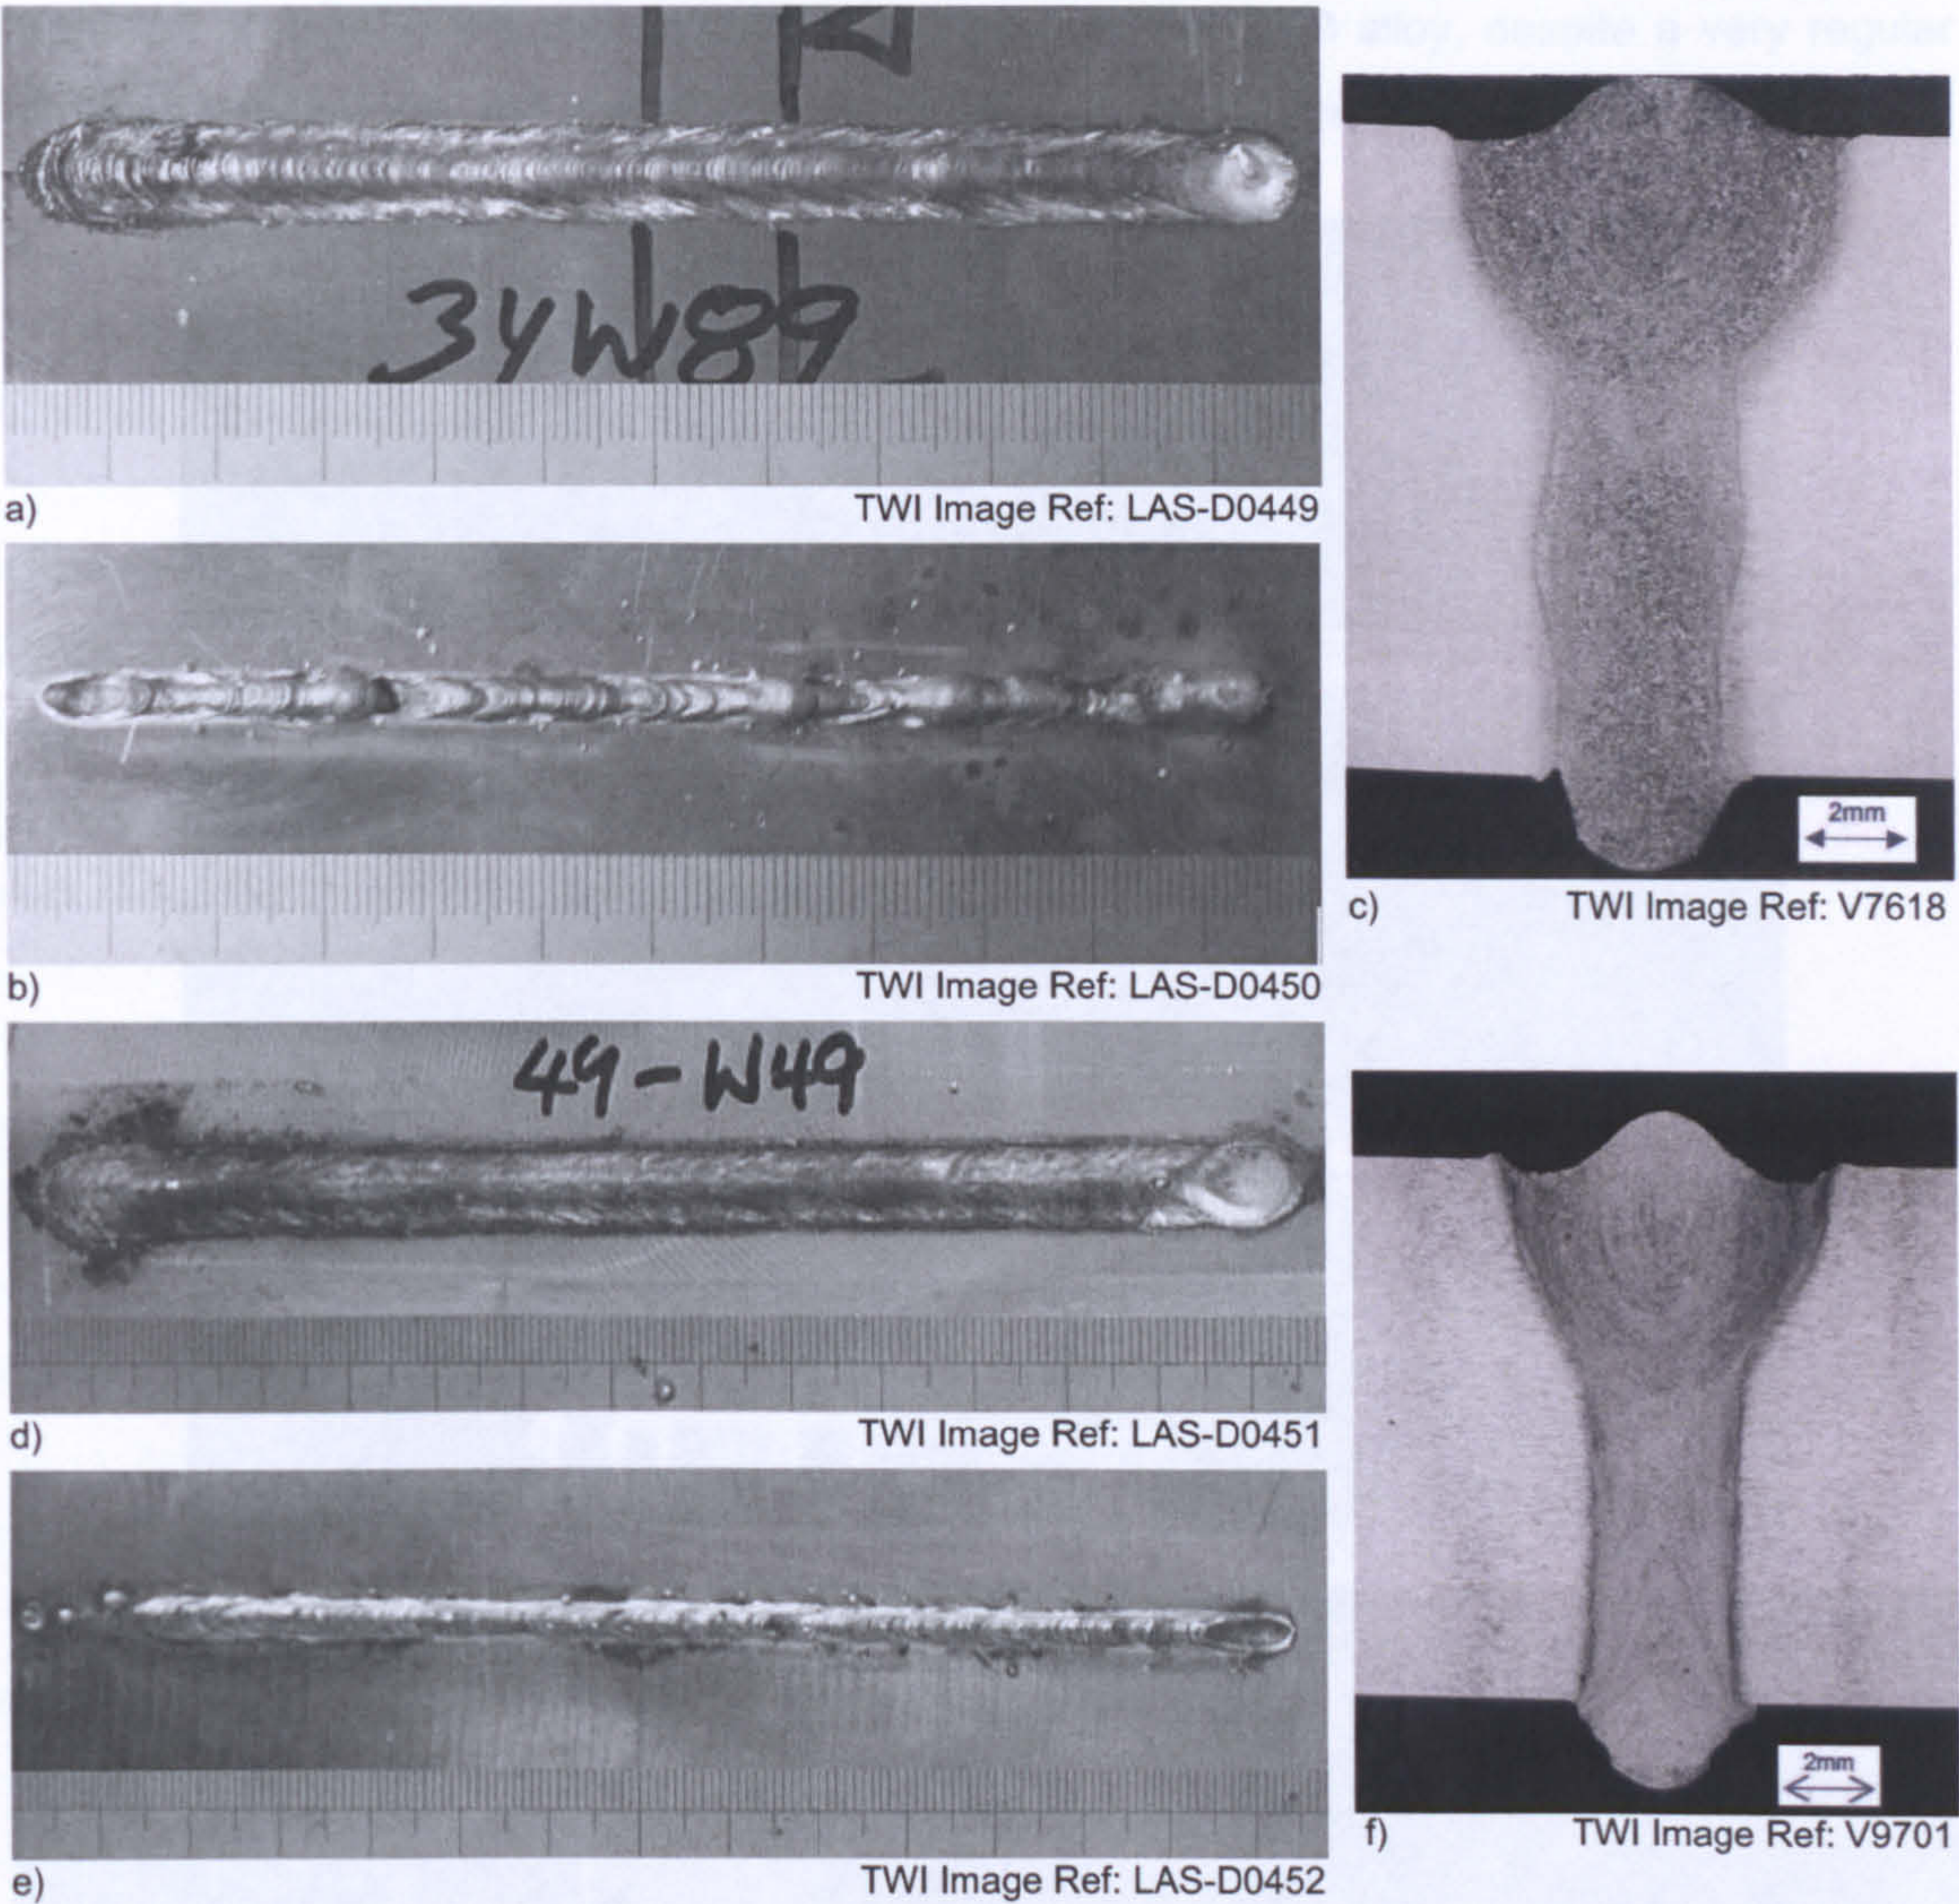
Fully penetrating melt runs produced in 12.7mm thickness 7xxx alloy using hybrid laser-MIG welding, using 2.65kW of MIG arc power (6m/min WFS) with 7kW of Yb-fibre laser power, at a welding speed of 0.92m/min when focused in a 0.4mm spot size (a-b-c) and a welding speed of 0.94m/min for a 0.6mm spot size (d-e-f):
